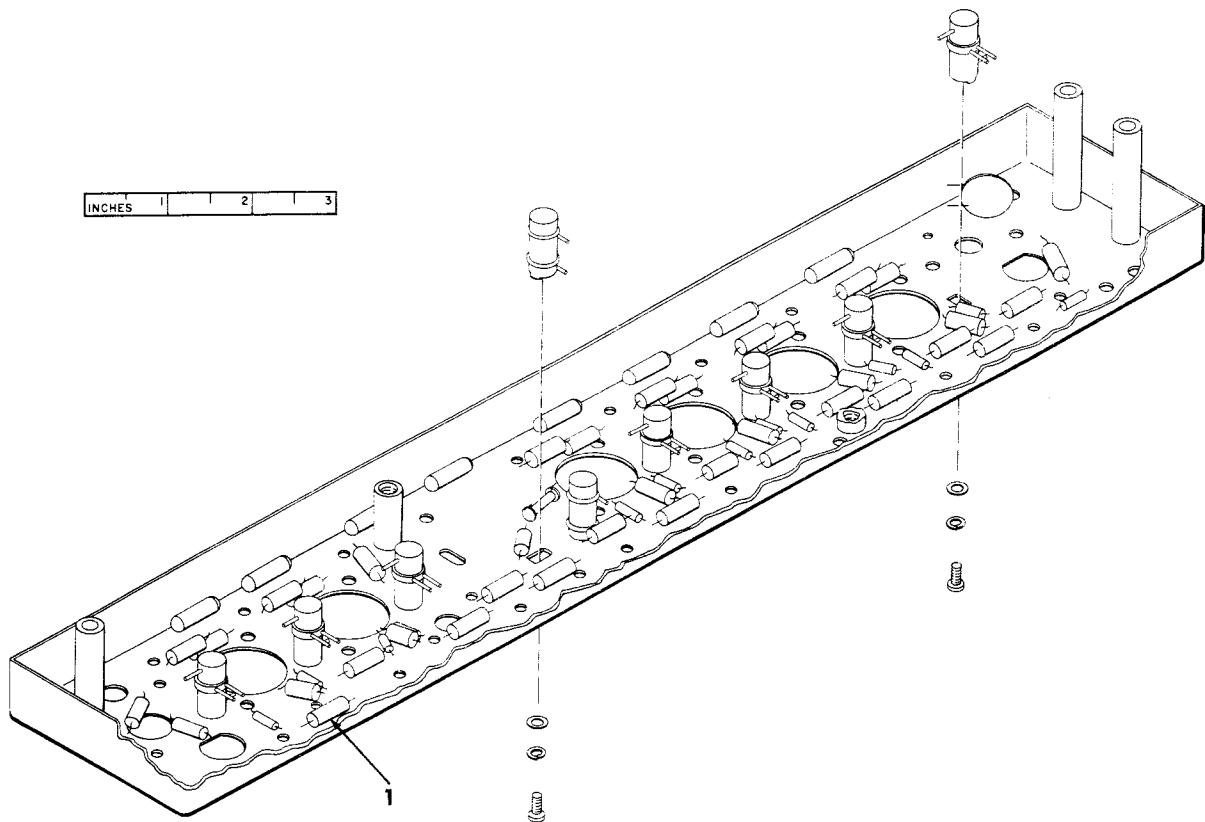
Control, electrical frequency (9009464)—partial exploded view
